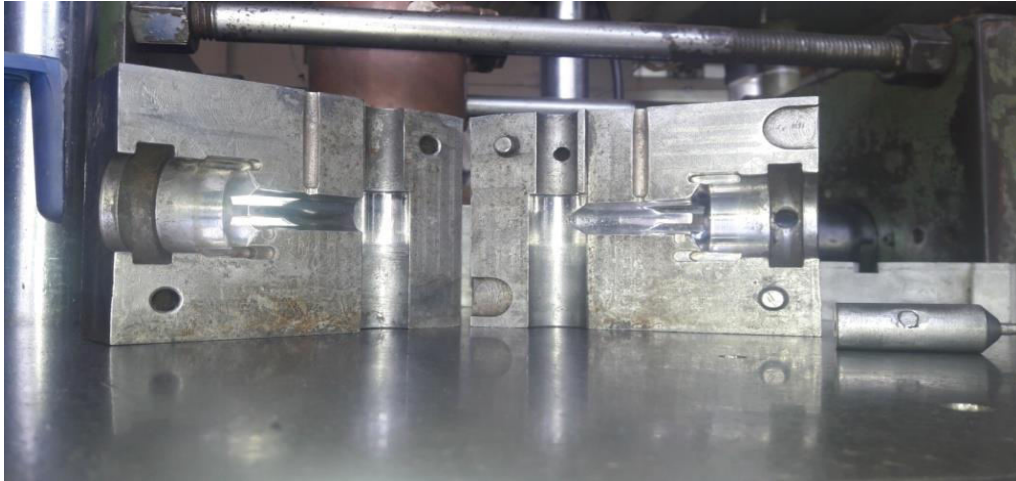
Photographical images of Tool and Die for the Nozzle component
